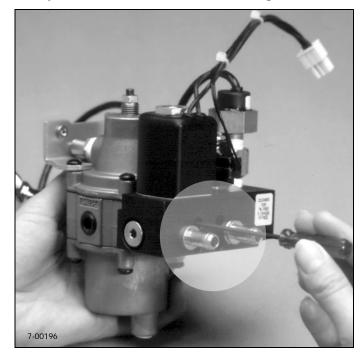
Separating the oxygen solenoid assembly from the oxygen regulator
